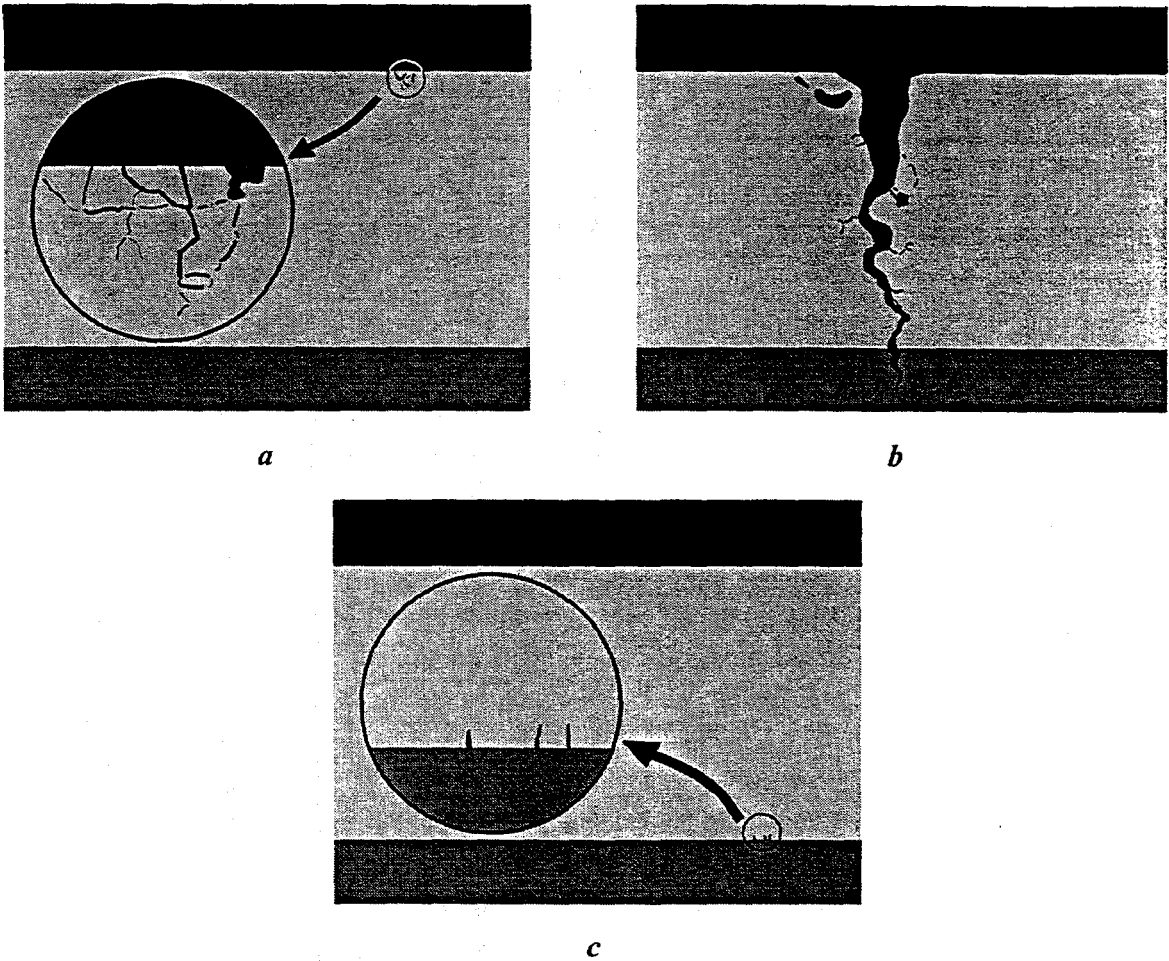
Intergranular cracking and interface cracking in coextruded tubes.
